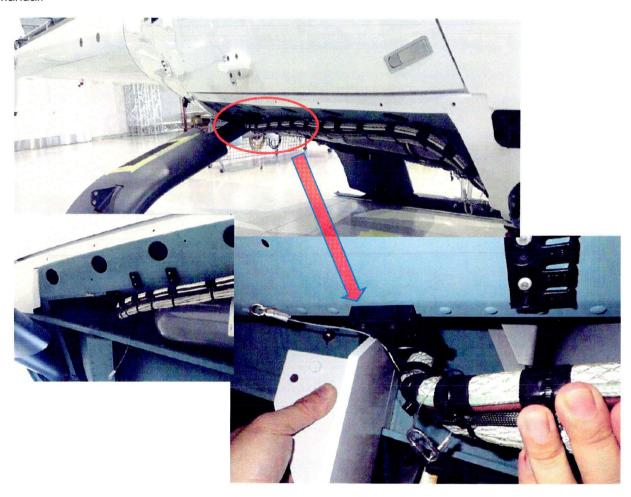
R/H AFT ANGLE ASSEMBLY INSTALLATION
